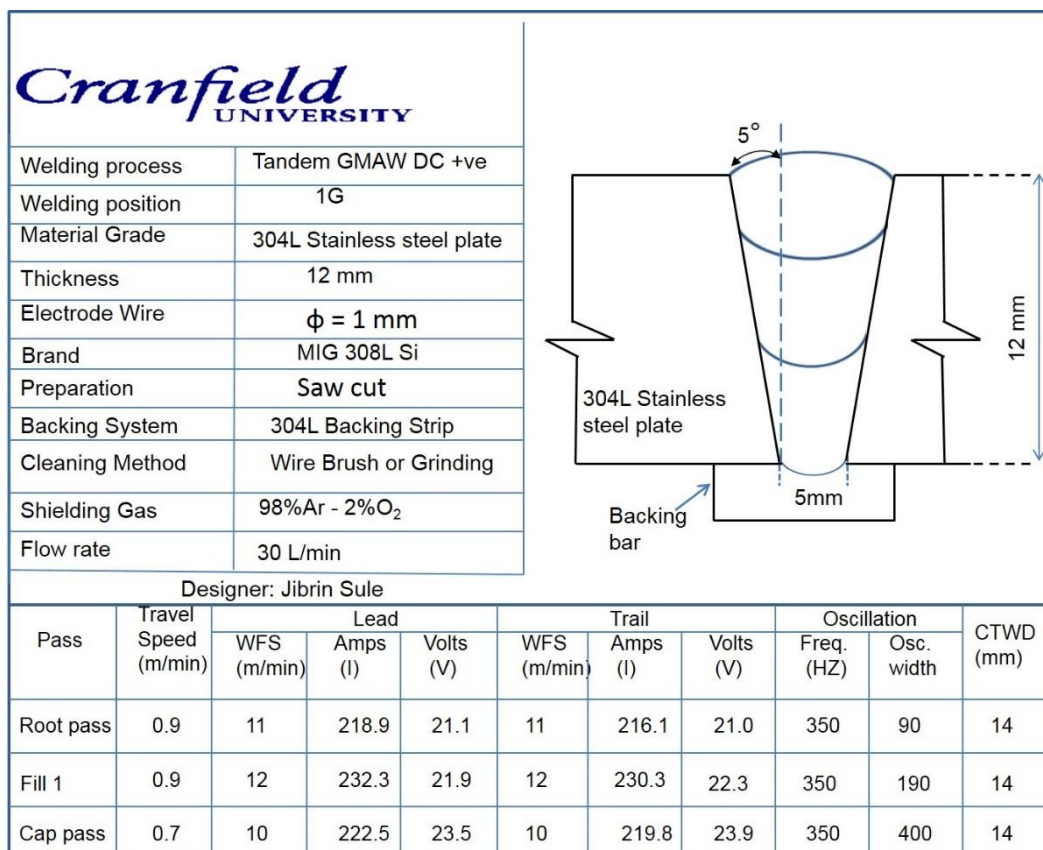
Welding parameters used for 304L stainless steel plate
